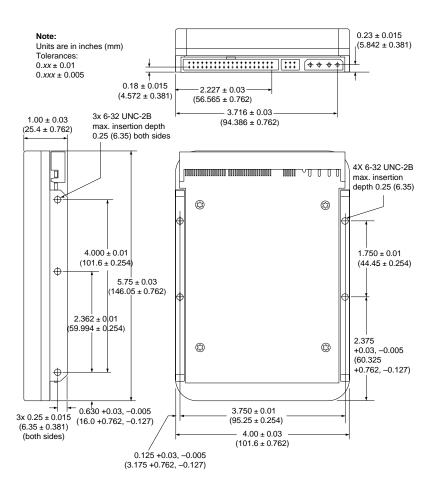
Mounting dimensions for the ST31720A—top, side and end view
